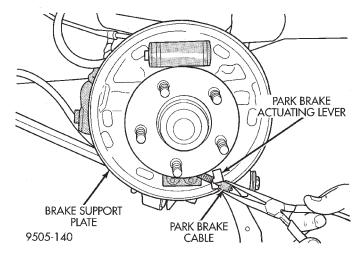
Park Brake Cable To Actuator Lever Attachment
